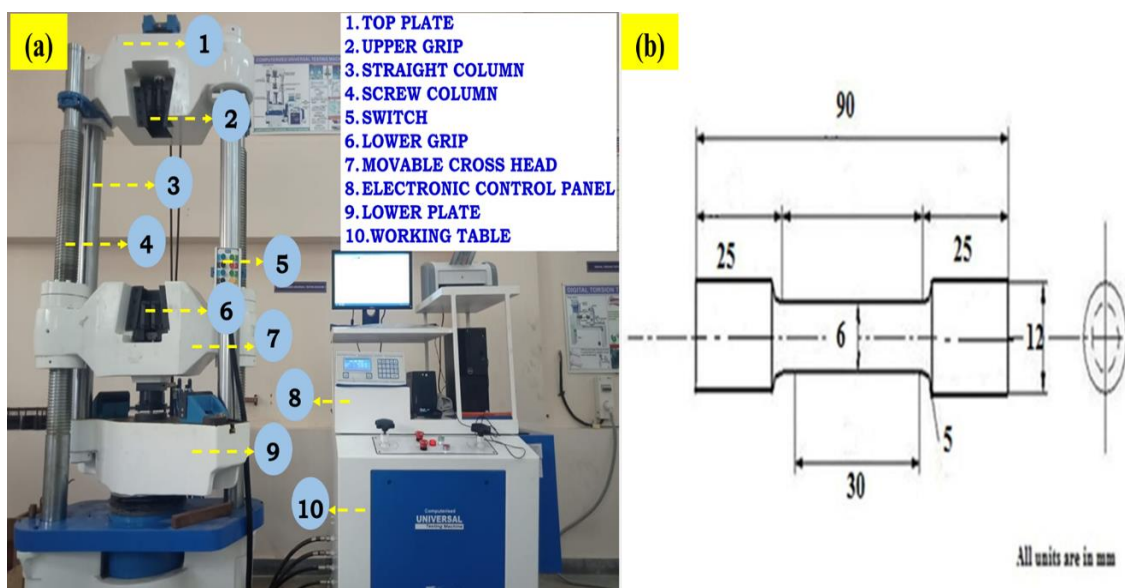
(a) Universal testing machine, and (b) Schematic of specimen used for tensile testing.
